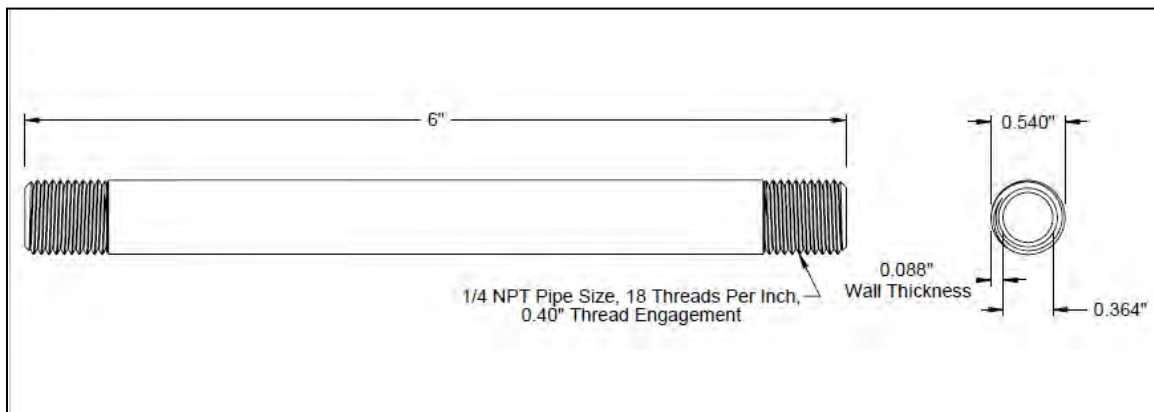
1/4 NPT pipe shroud tube drawing.
